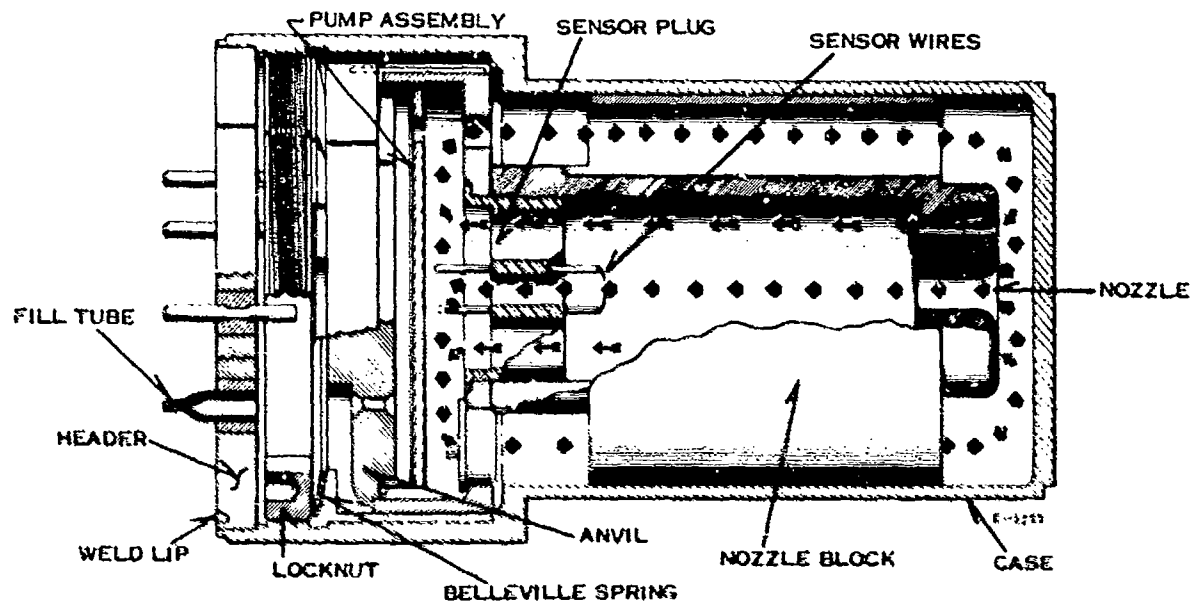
SUPERJET™ SENSOR—CROSS SECTION VIEW
